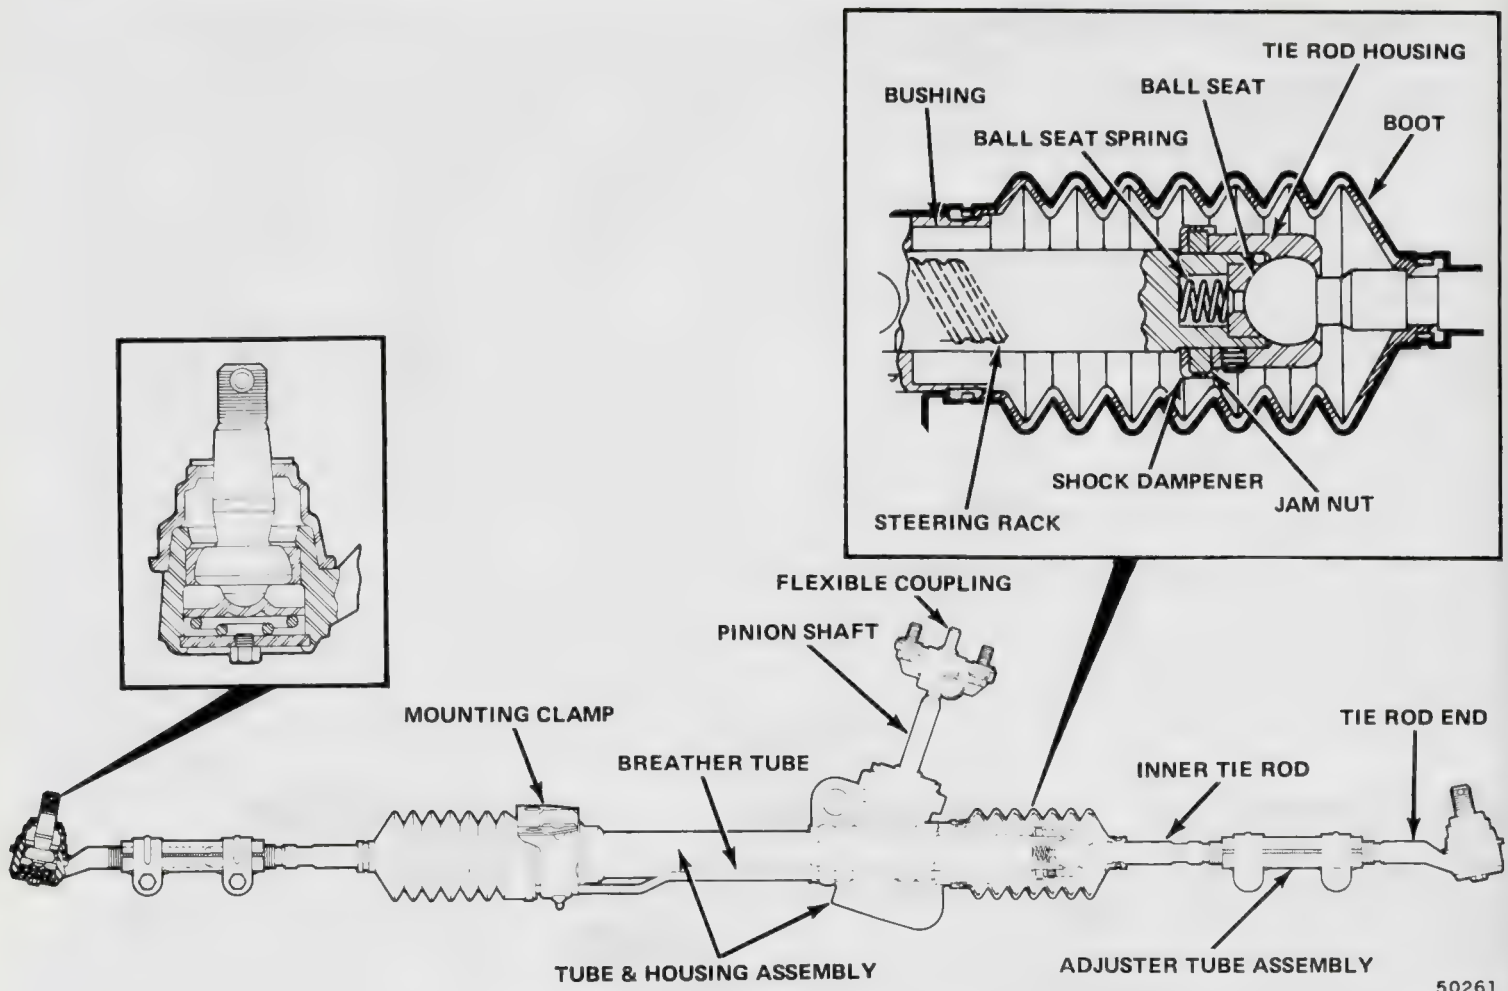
J-13 Manual Rack and Pinion Steering Gear
